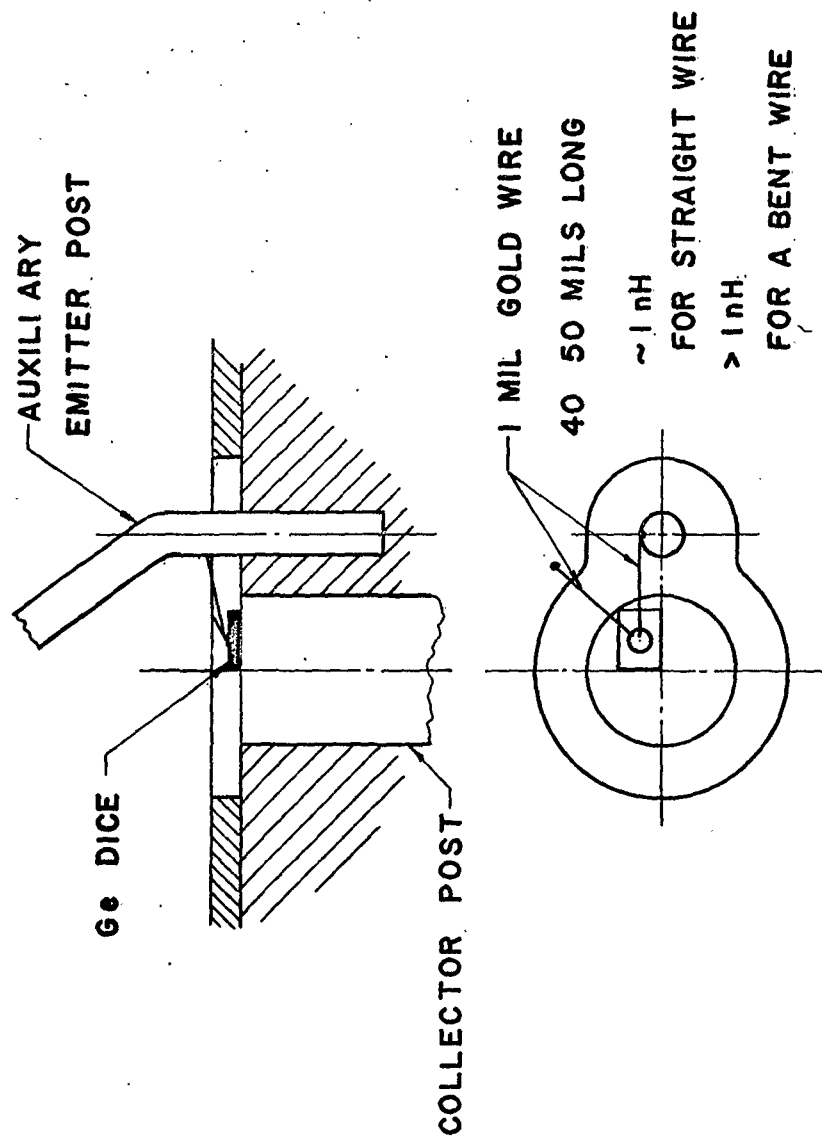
CROSS-SECTIONAL DRAWING OF HUGHES DESIGN I
